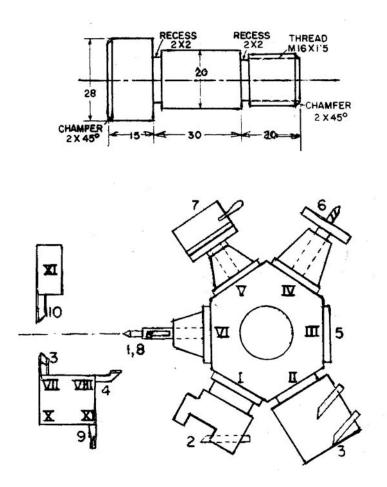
Tool layout for a typical job in single automatic lathe.
